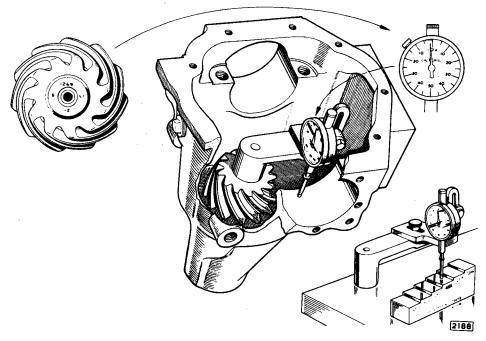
Checking the pinion cone setting using Tool Part No. SL.3. Note the pinion setting marks located on the end of the pinion.
